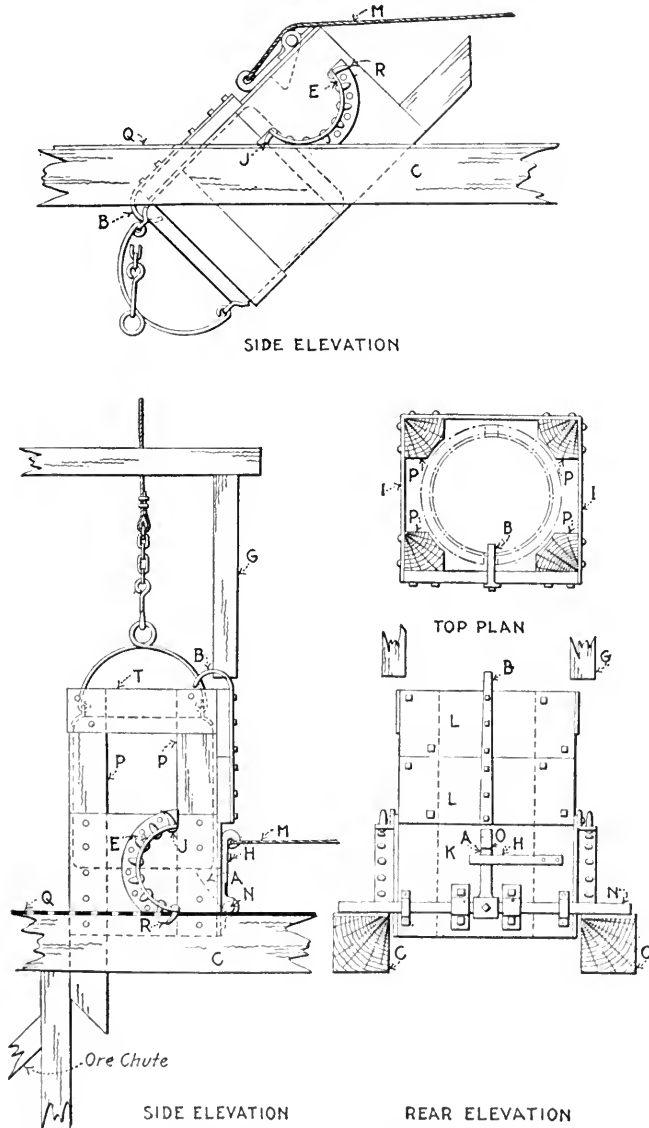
DEVICE FOR DUMPING BUCKET.
